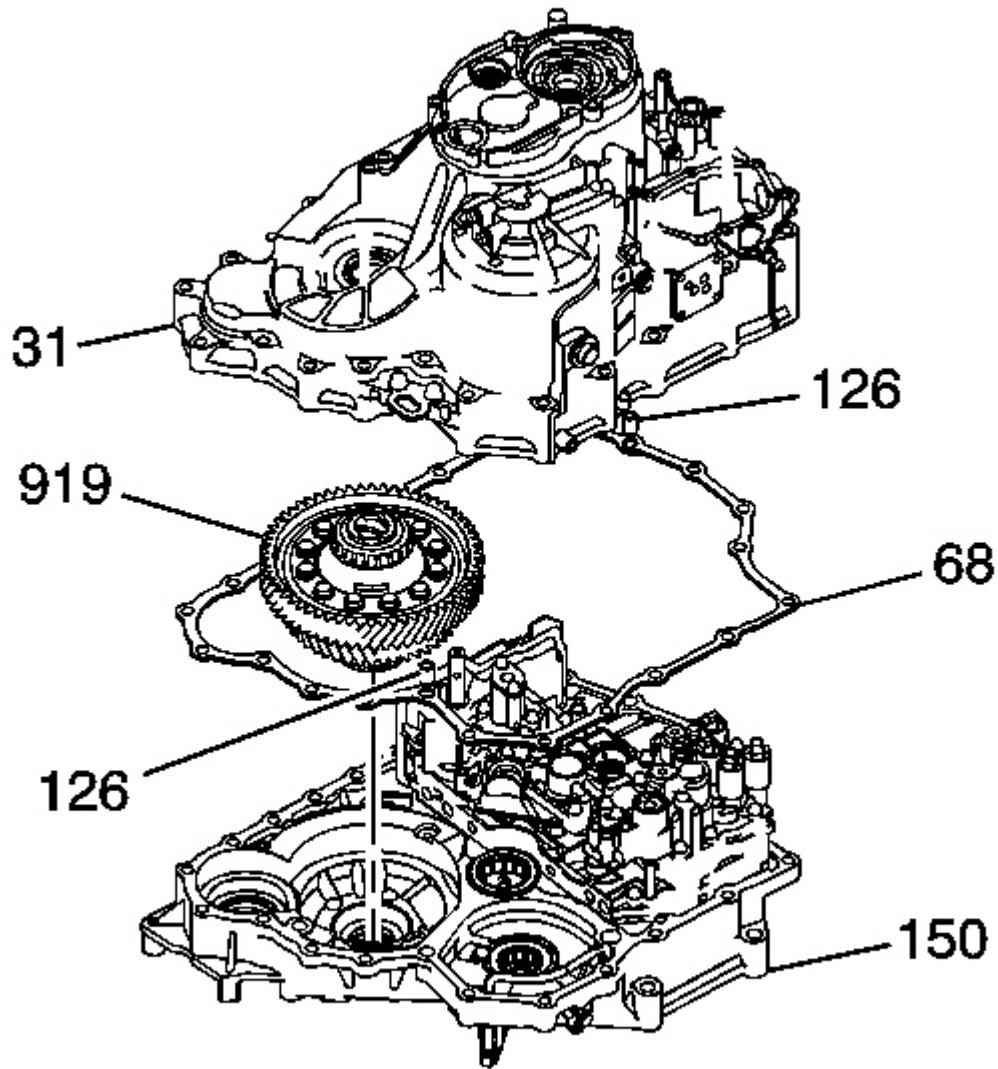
Front Differential Assembly, Torque Converter Housing, Gasket & Transmission Case
